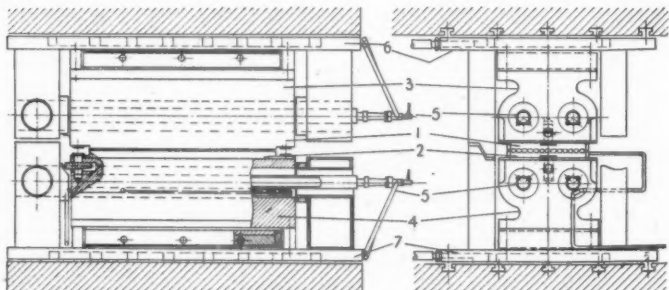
Tools used for German heat-exchanger element. 1, 2: top and bottom dies; 3, 4: heat-resisting steel blocks; 5: gas burners; 6, 7: water cooled plates.
